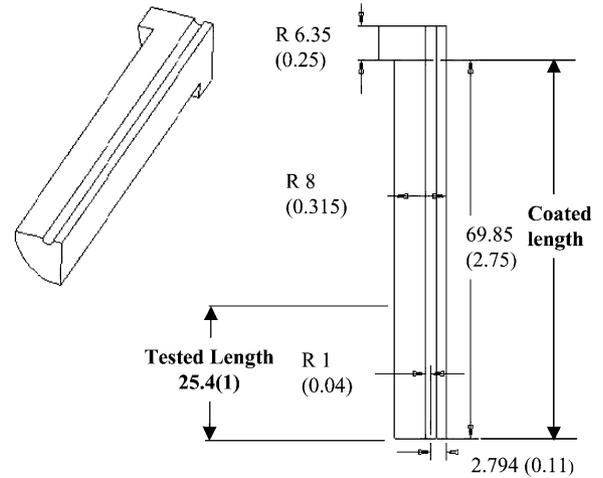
Test coupon. All dimensions in mm. Dimension in parenthesis are in English units.
